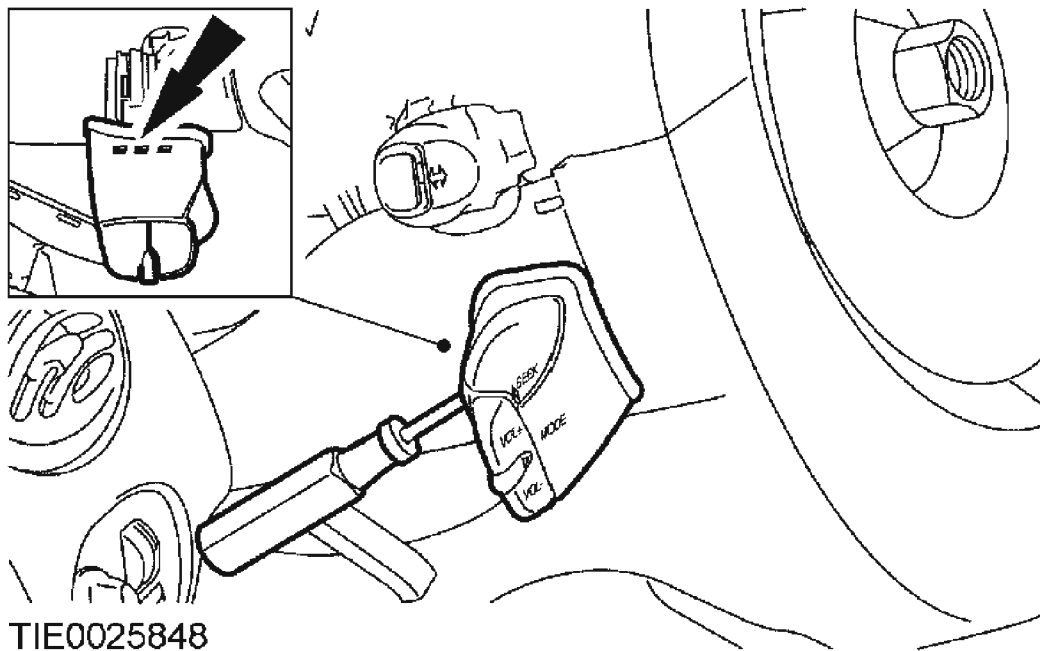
Detaching Audio Control Switch From Steering Column Lower Shroud
